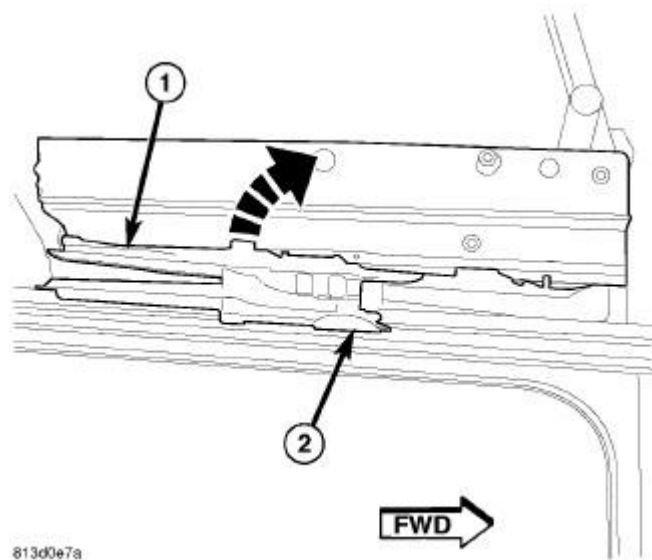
Pushing Drive Cable & Guide Plate Forward
